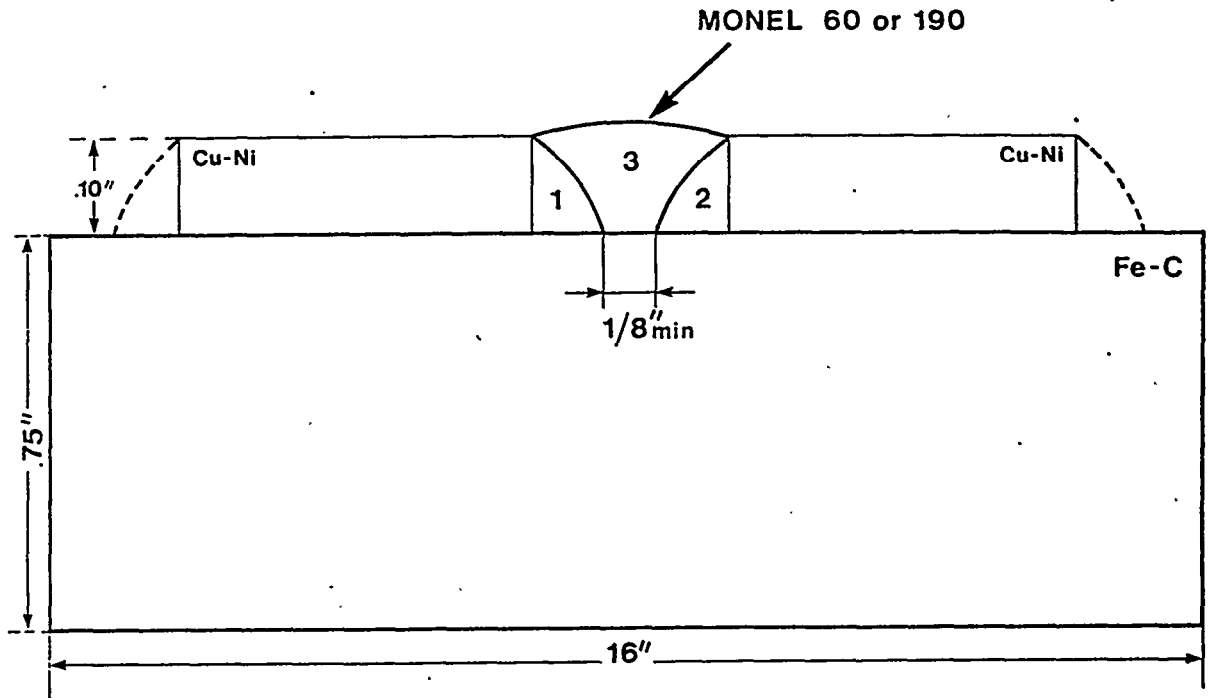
"Fillet welds and fill-in pass" methodology for welding Cu/Ni sheaths to the underlying steel hull plate.
